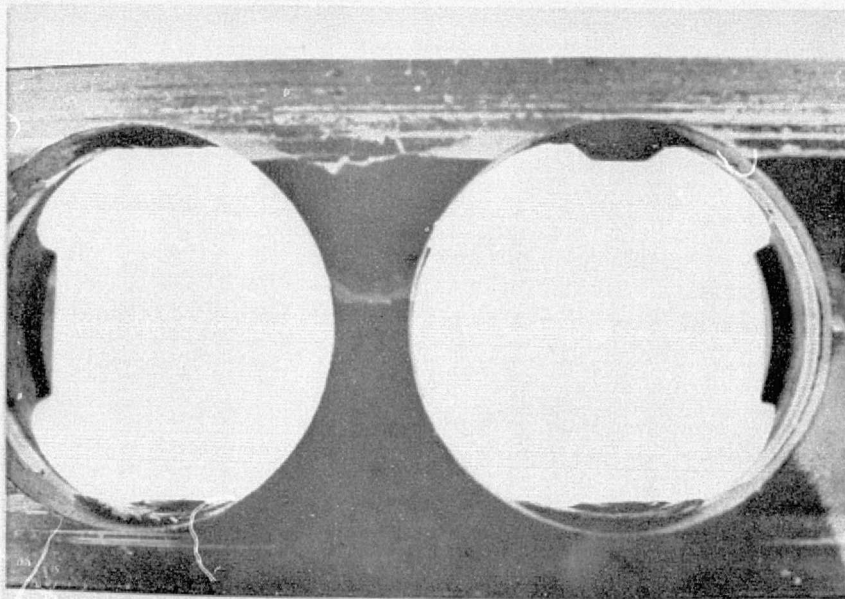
View of Cage After Completion of Test Showing Damaged Pocket Restraints and O.D. wear.
